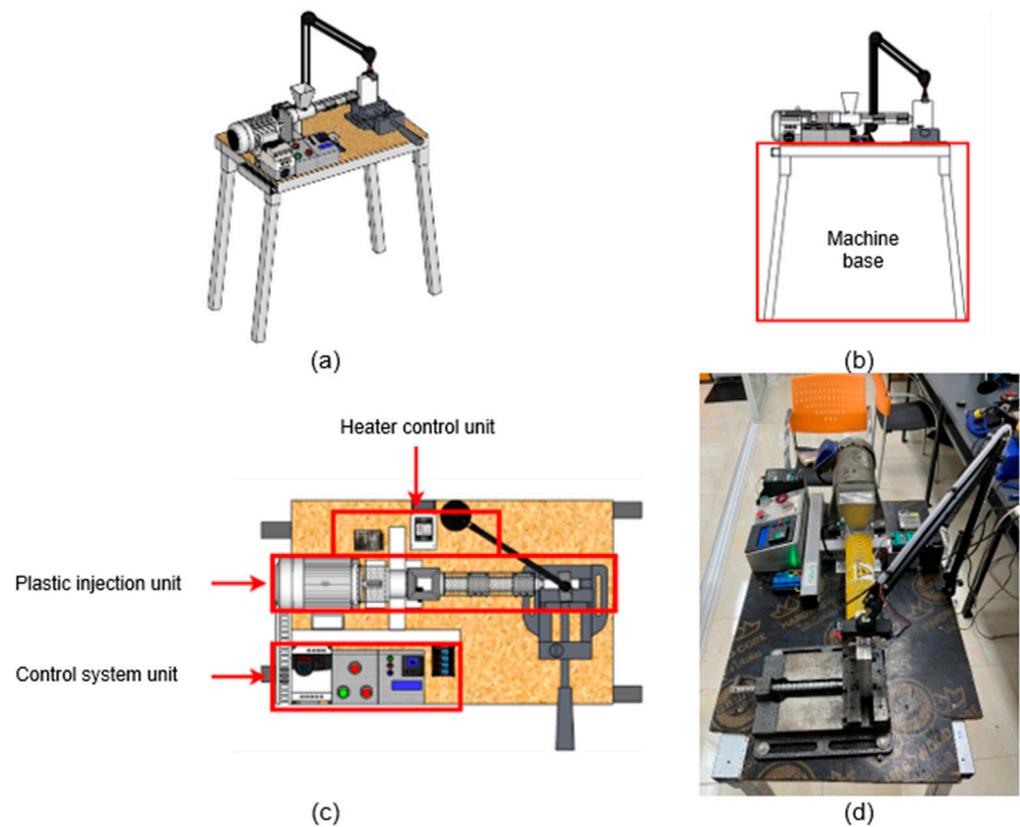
Structure and view of the automatic injection molding machine: (a) three-dimensional model of the machine; (b) front view—machine base; (c) top view—control unit; and (d) actual constructed machine.
